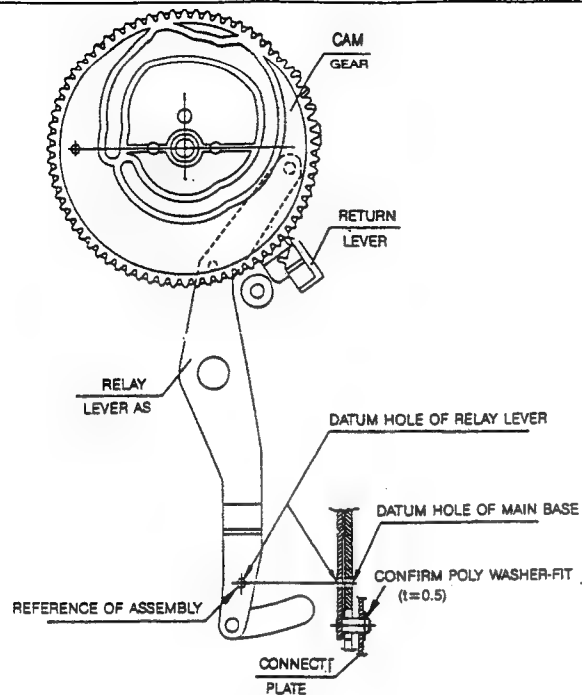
Reference of assembly for the Cam Gear and Relay Lever
